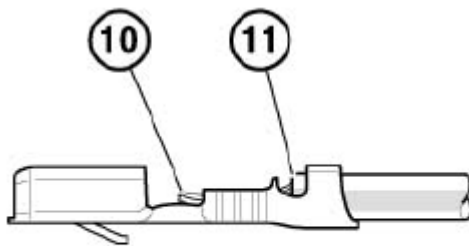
Identifying Insulation Crimp And Wire Crimp
